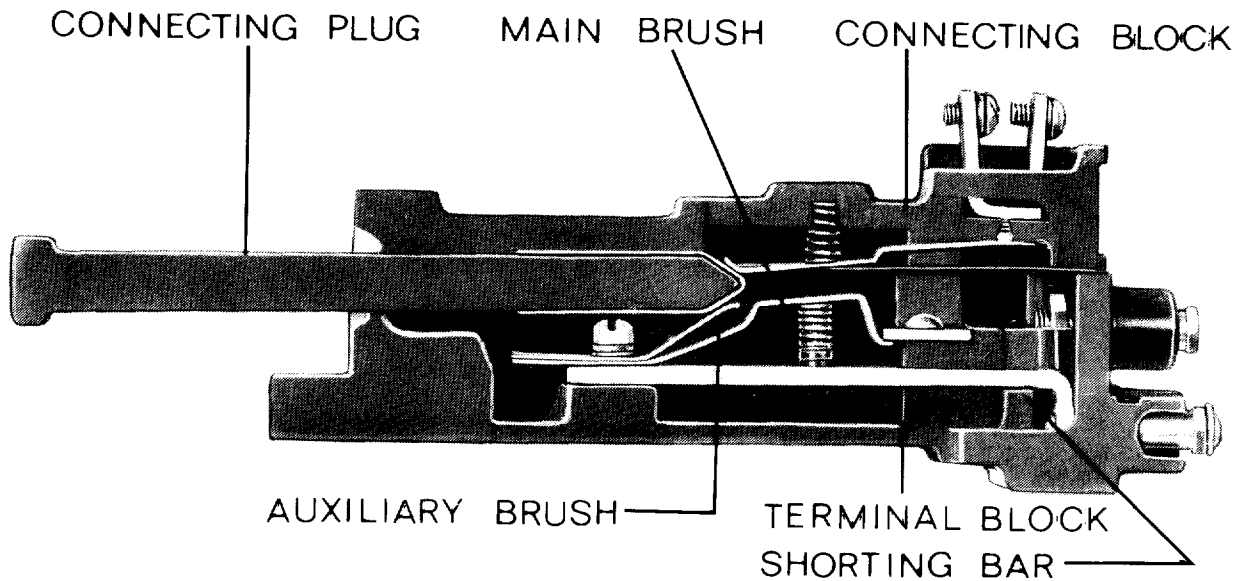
(8027688 and 8023399) Low Gradient Contact Assembly for the Directional Unit
